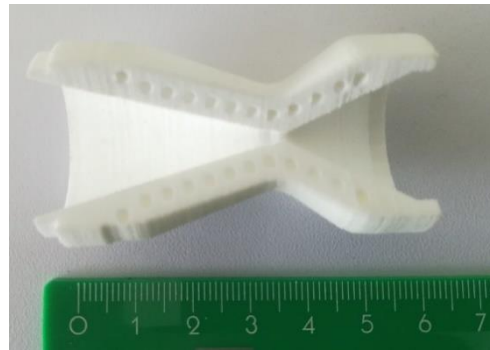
Example of additive manufactured arcjet nozzle cut out MARC-6 with integrated cooling channels made from laser sintered polyamide.
